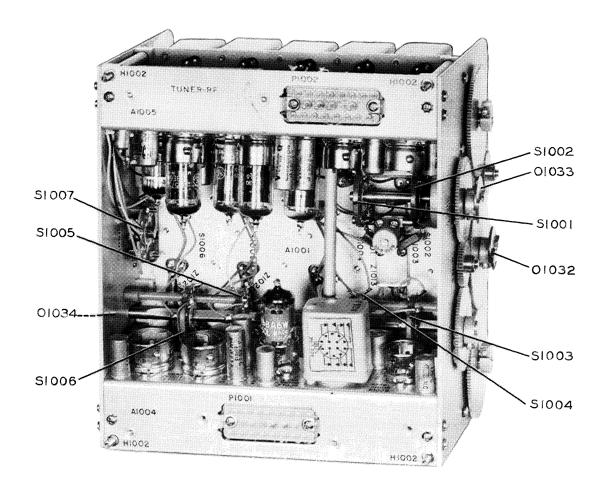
R-F Tuner, Mechanical Alignment Points
